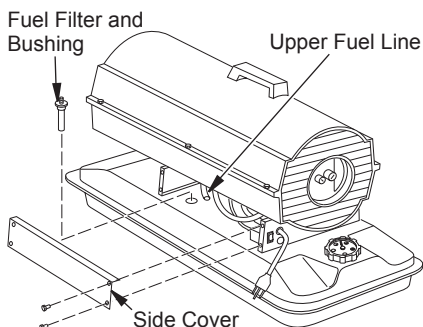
Fuel Filter Removal, 40/50/55/60/70 Models
